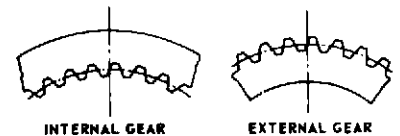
INTERNAL & EXTERNAL GEARS
